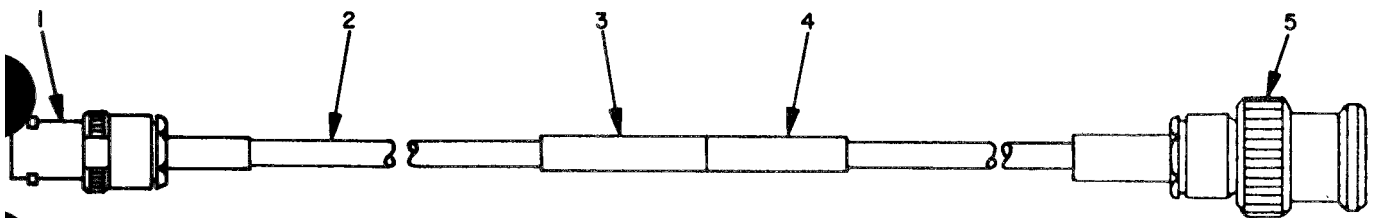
Adapter cable assembly W9C (467-117-001) and W9D (467-118-001)
